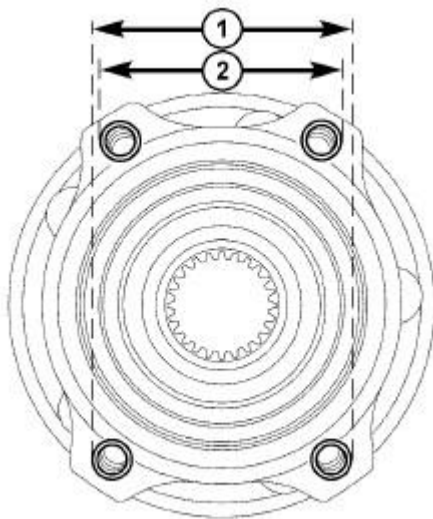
Hub And Mounting Bolts, Knuckle & Adapter
